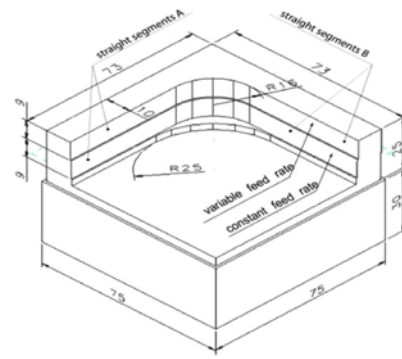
The geometry of the test piece surfaces and coordinates of the key points of the corner
